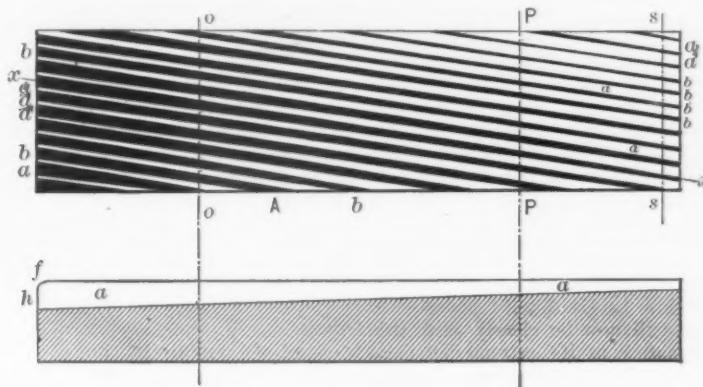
Plan and Section of One Die for Rolling Threads.
